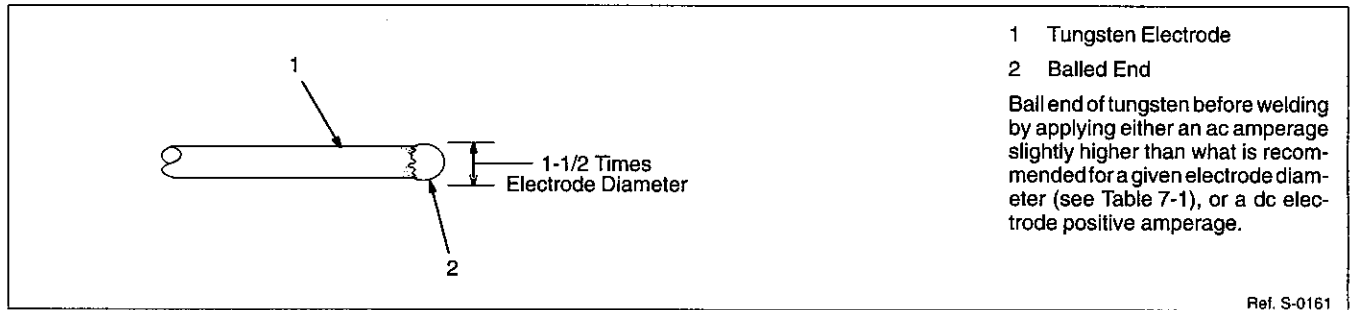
Preparing Tungsten For AC Or DC Electrode Positive (DCEP) Welding
